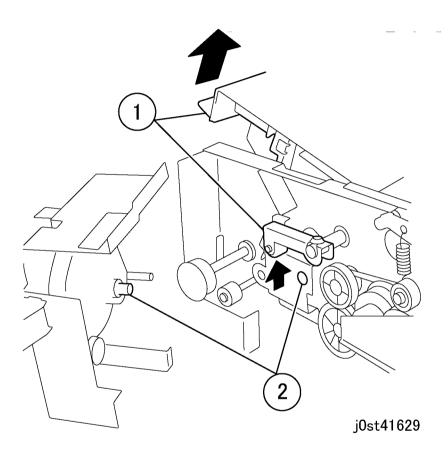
Installing the Cam Bracket Assembly (j0st41629)
